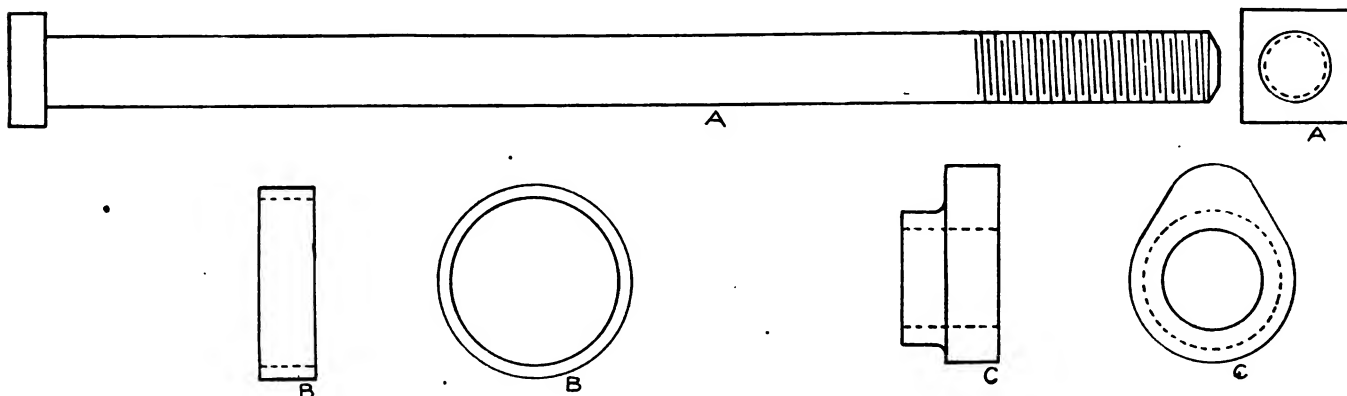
SHOWING BOLT, WASHER AND CAM BEFORE ASSEMBLING
